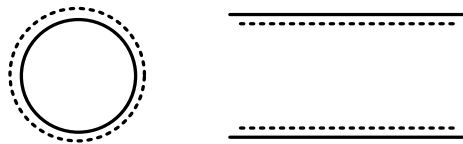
Intended dimensions (solid) and fabricated dimensions (dashed).
